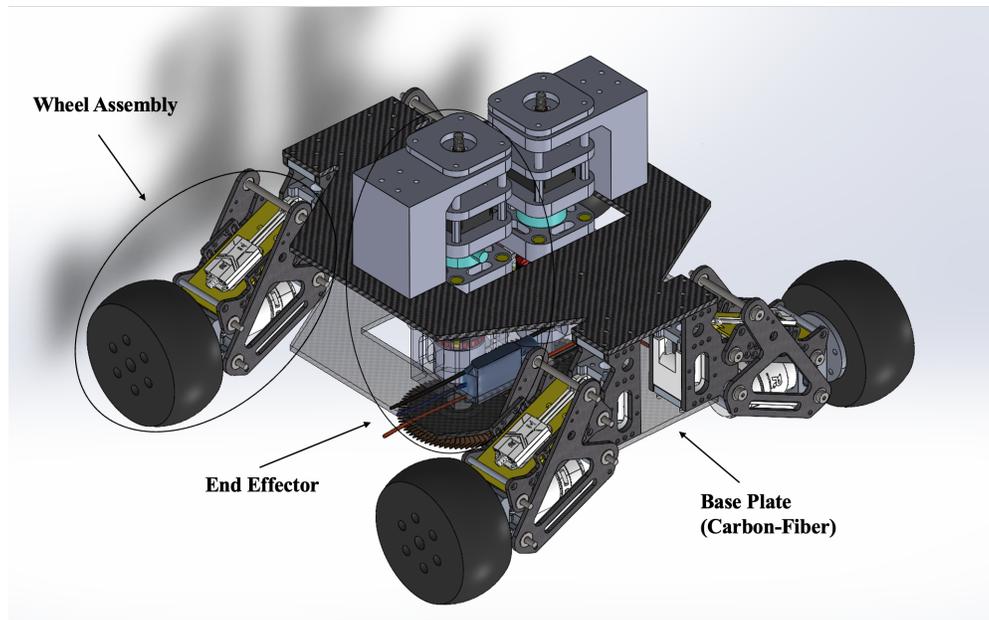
Overall view of the magnetic-wheeled rust-removal robot
